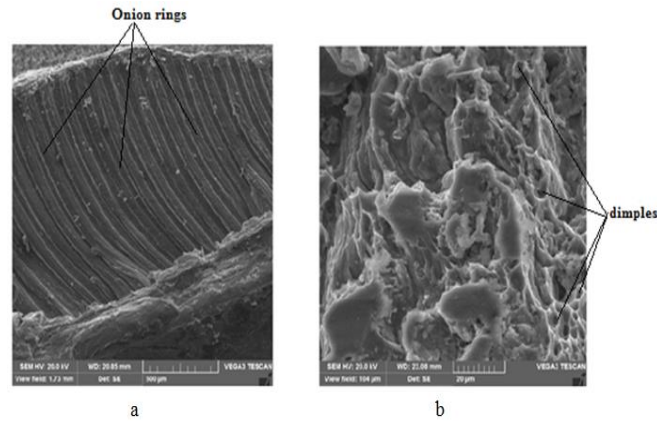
SEM fractography images for similar 1100/1100 FSL joint fracture at 1000rpm & 100mm/min.
